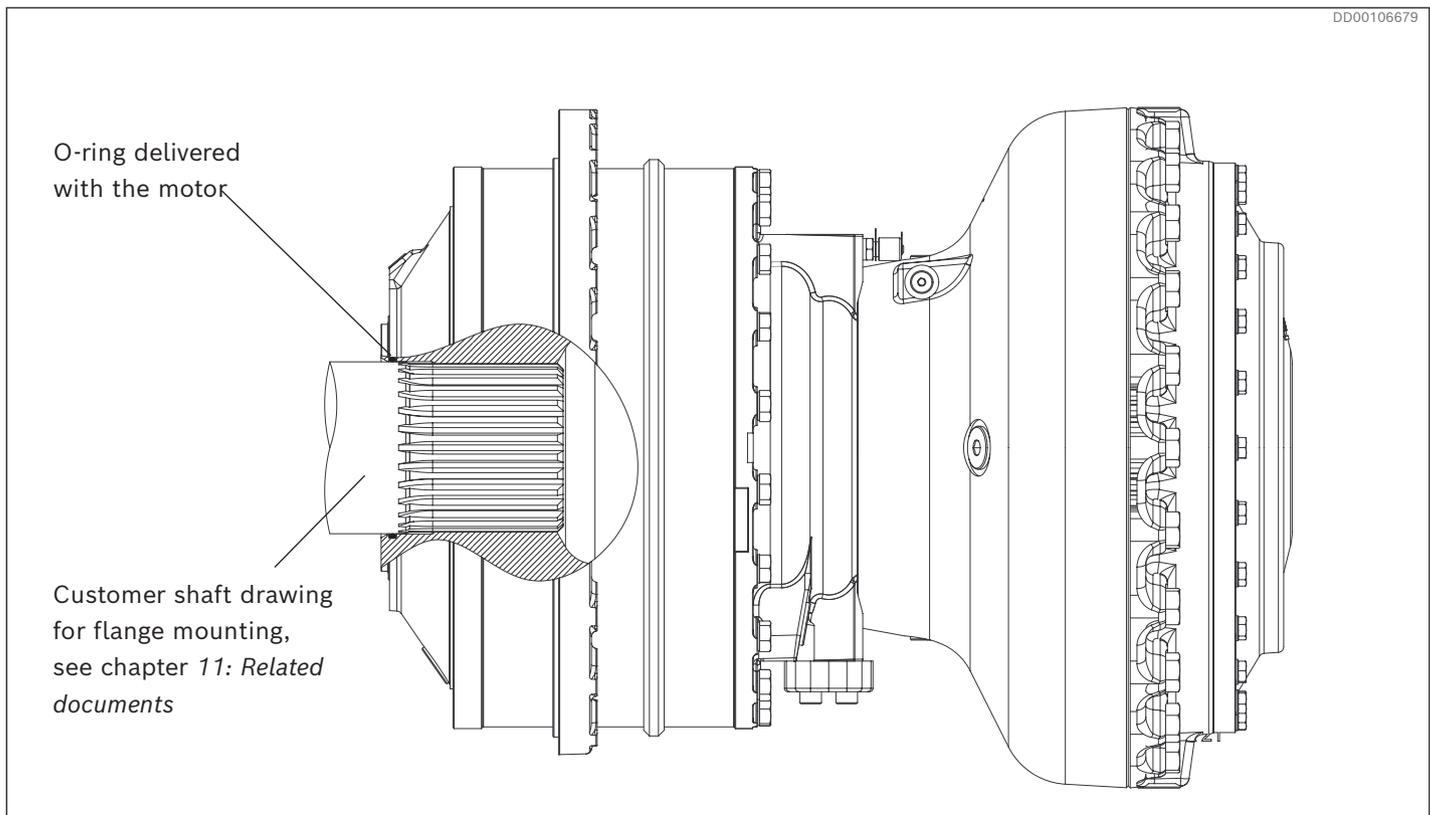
Example torque arm mounted CA motor with spline or shrink disc coupling and MDA brake on customer shaft
